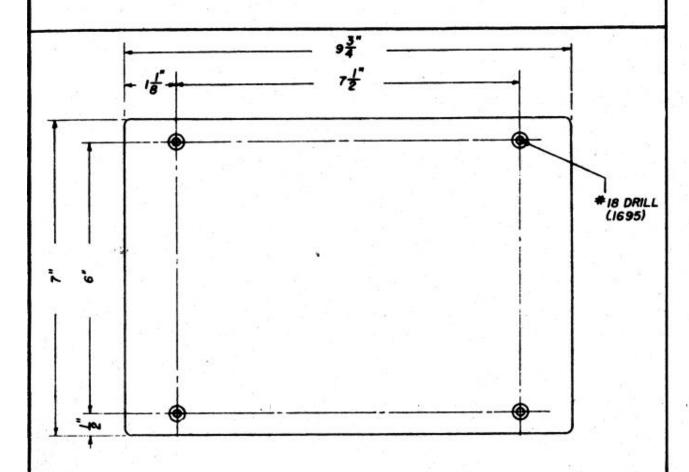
REMOTE CONTROL BASE PLATE OUTLINE DIMENSIONS
